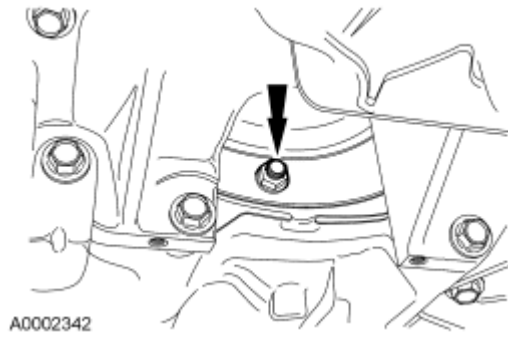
Identifying Heated Oxygen Sensor (HO2S) Bracket & Stud Bolt
